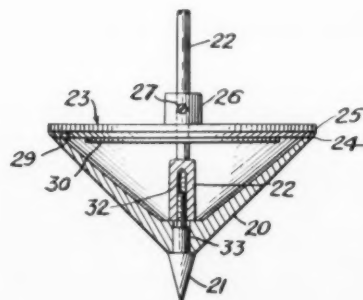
is an elevation of the cone in a standard cup used for testing.
